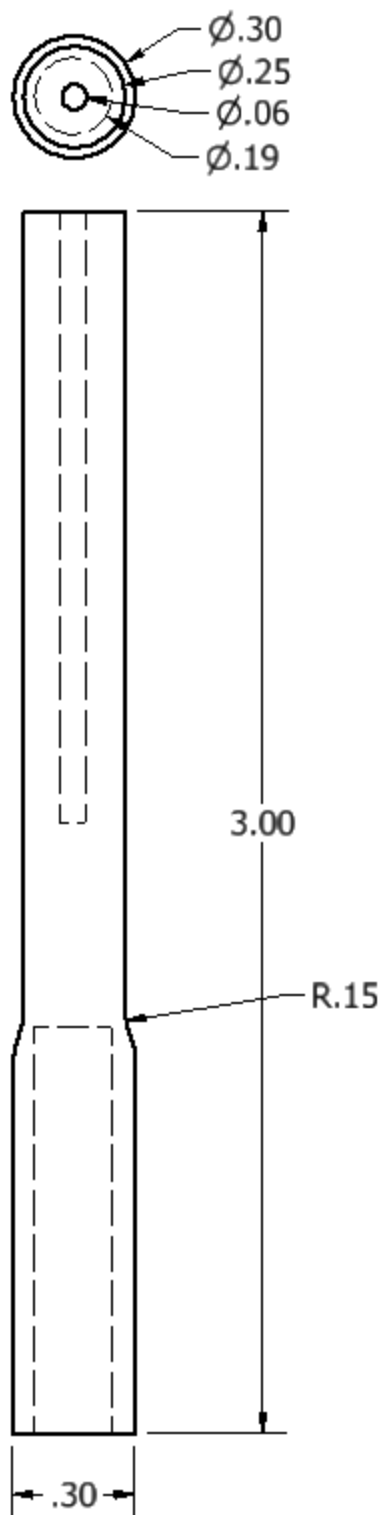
Connector rod for Mark 2 grabber. Dimensions in inches.
